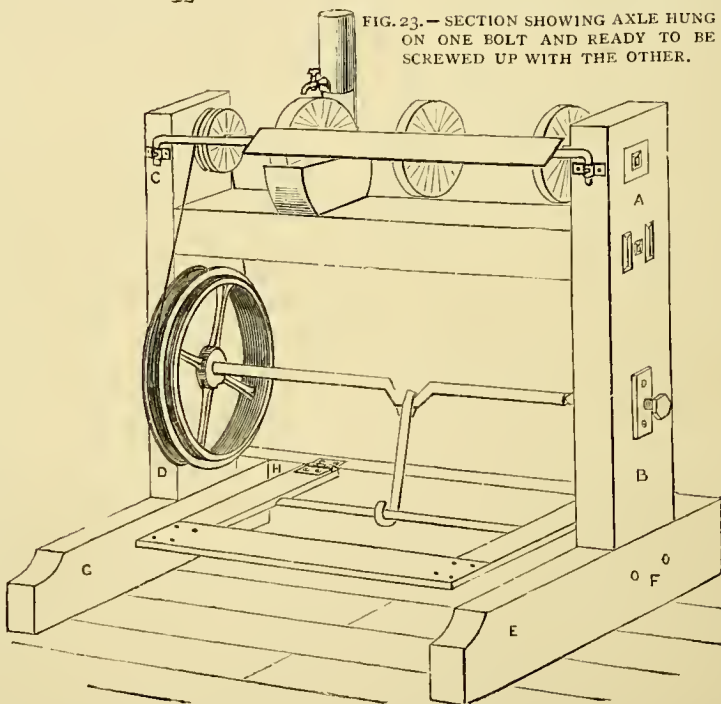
VIEW OF TREADLE GRINDING MACHINE COMPLETE.
